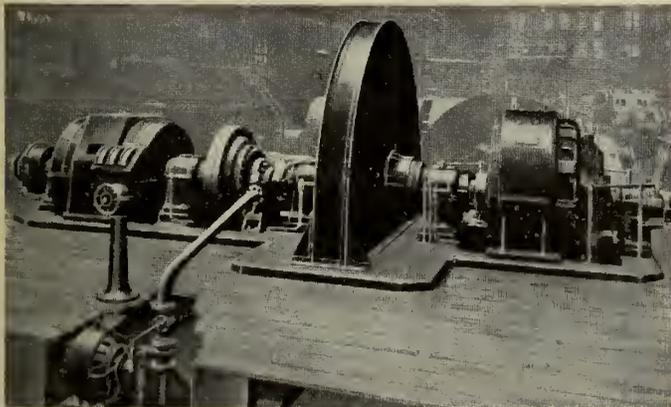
Flywheel Generator Set with Vulcan-Sinclair Hydraulic Slip Regulator, Driven by Synchronous Motor of 1,000 h.p. at 1,000 r.p.m.
